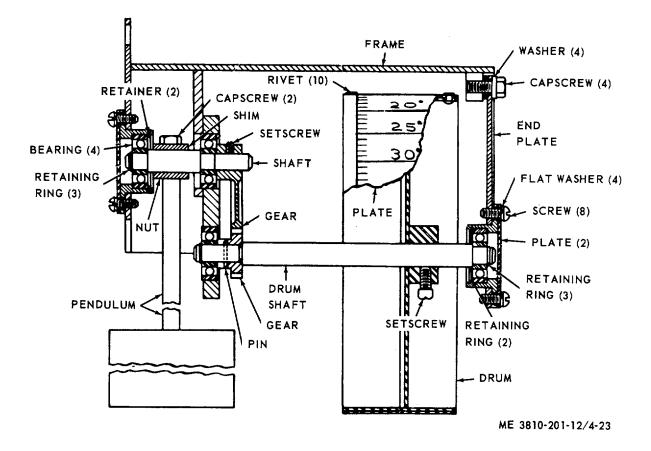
Radius (boom angle) indicator, removal, disassembly, reassembly, and installation
